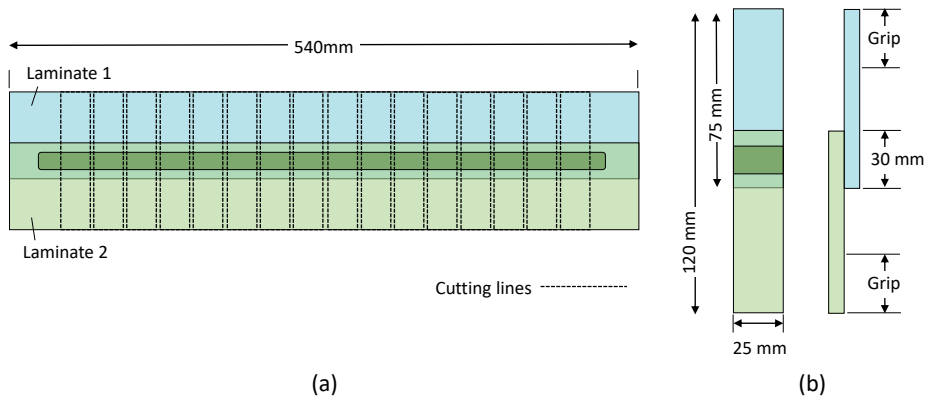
Welded joint validation specimen: a) Welded laminates and SLS cutting scheme; b) SLS specimen dimensions.
